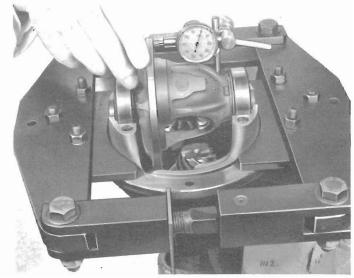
Measuring the crown wheel mounting face of the carrier prior to dismantling
